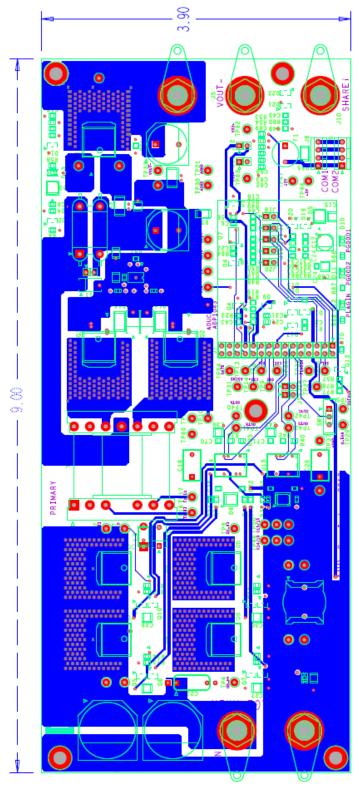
Figure 54 - Layout, bottom layer, dimensions in inches
